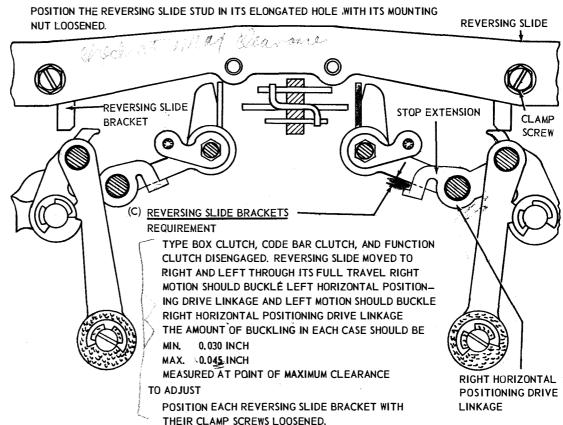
TYPING UNIT, HORIZONTAL MOTION REVERSING MECHANISM FRONT VIEW
